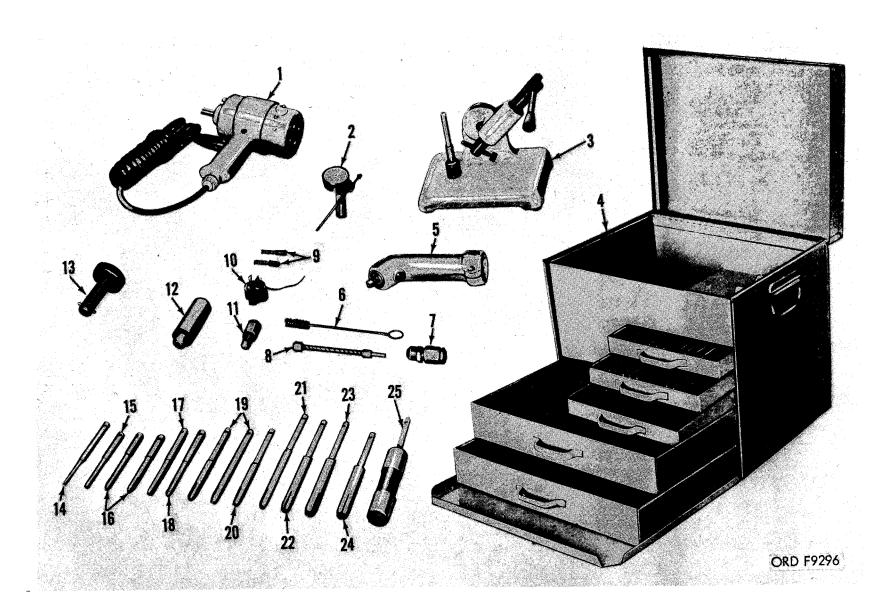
Grinding kit w/equipment and repair parts (for 35472: model P300BB-M2).
